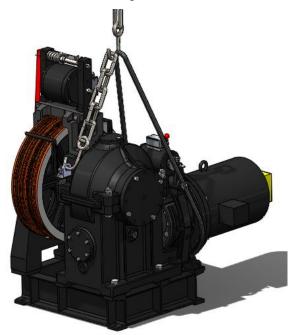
TGD2-SB Machine Recommended Hoisting Method
